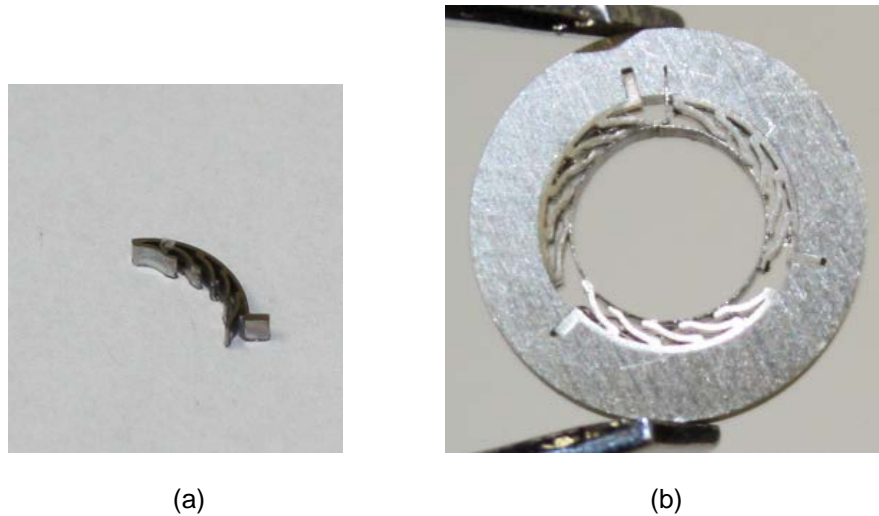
Optical image of manufactured Design II elastic foundation (from X-ray lithography) and assembled foil bearing, (a) Design II elastic foundation, (b) Assembled foil bearing.
